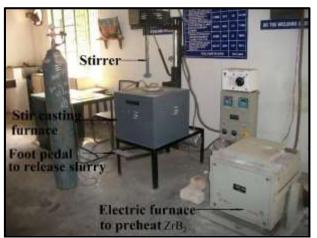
Electric stir casting furnace employed to fabricate AA7075/ZrB₂ composites
